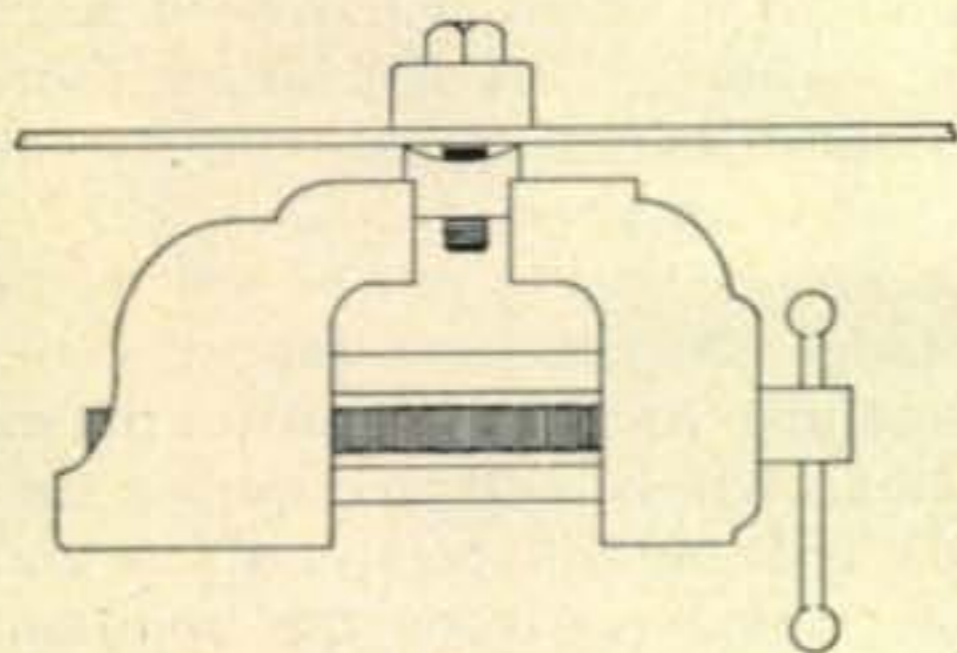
Punch assembled through pilot hole on piece of metal and held in vise clamped to parallel flat edges on the punch. Where space does not permit use of vise, the work may be held by hand. The punch will not rotate during the operation, because it bites into and locks against the metal.
